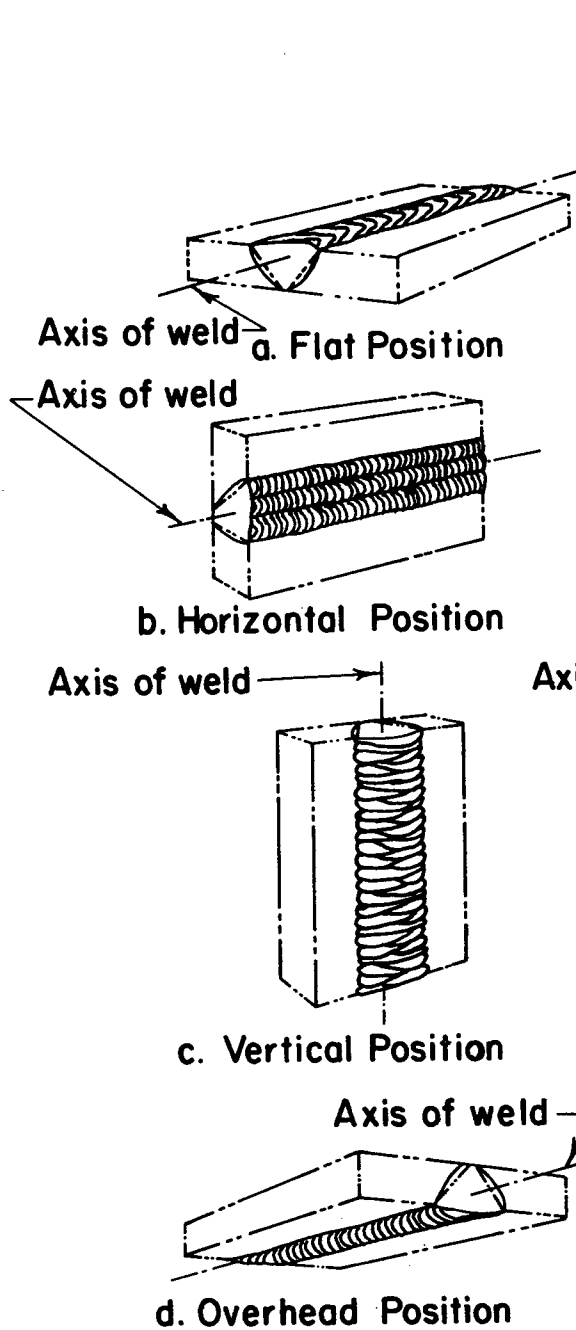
POSITIONS OF WELDING FOR GROOVE WELDS
